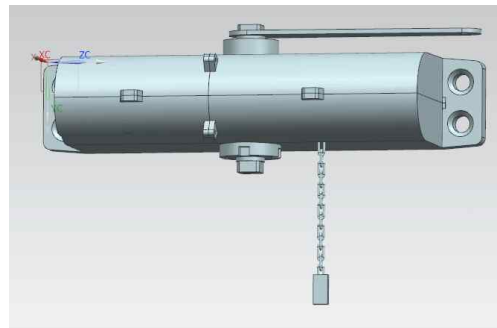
CAD modeling of a generator-type damper with adjustable damping
